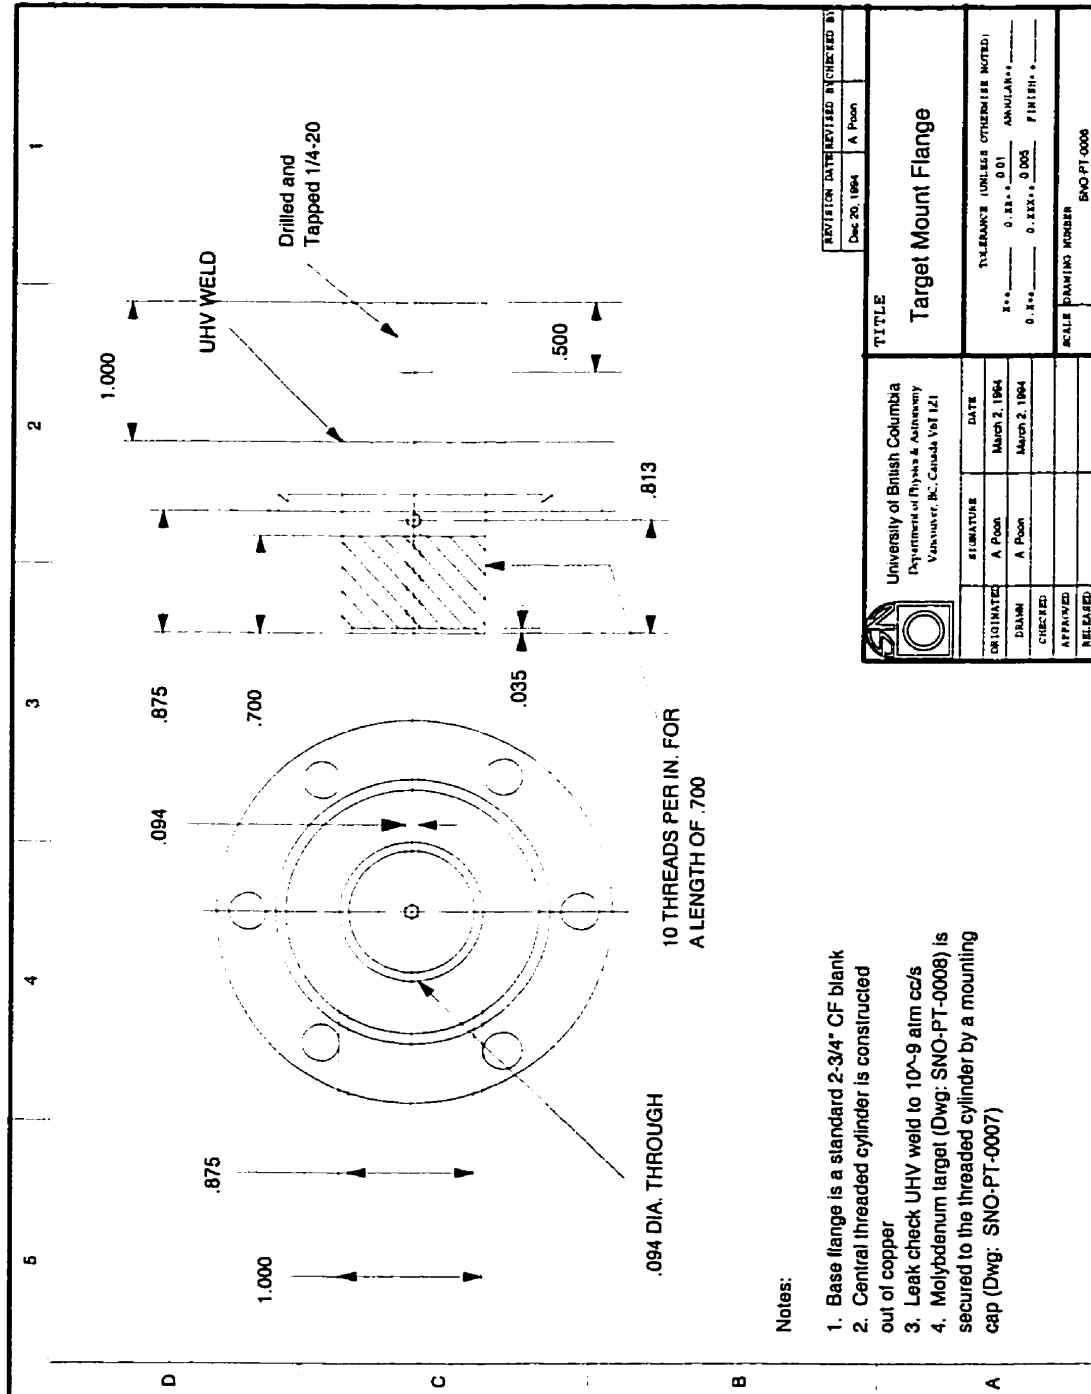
Technical drawing of the target mount flange. (SNO-PT-0006).
